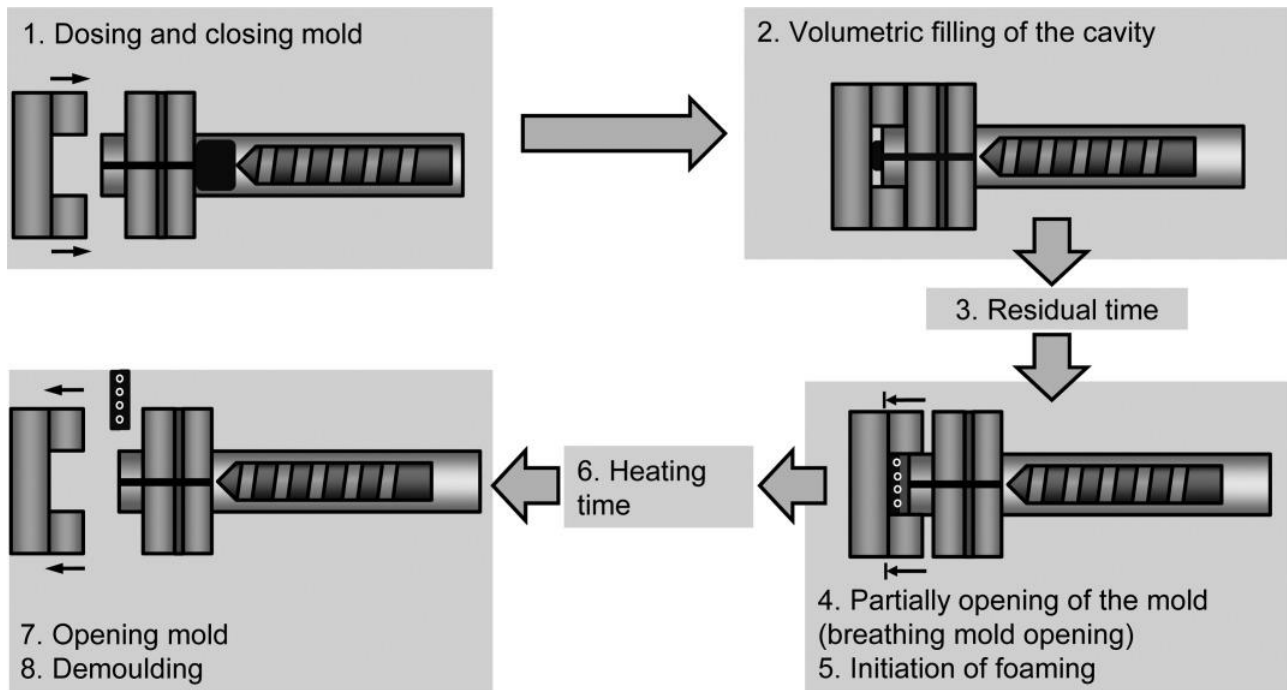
Process sequence of the breathing mold technique in injection molding. (Reproduced with permission from [65]. Copyright 2016 John Wiley & Sons, Inc.)
